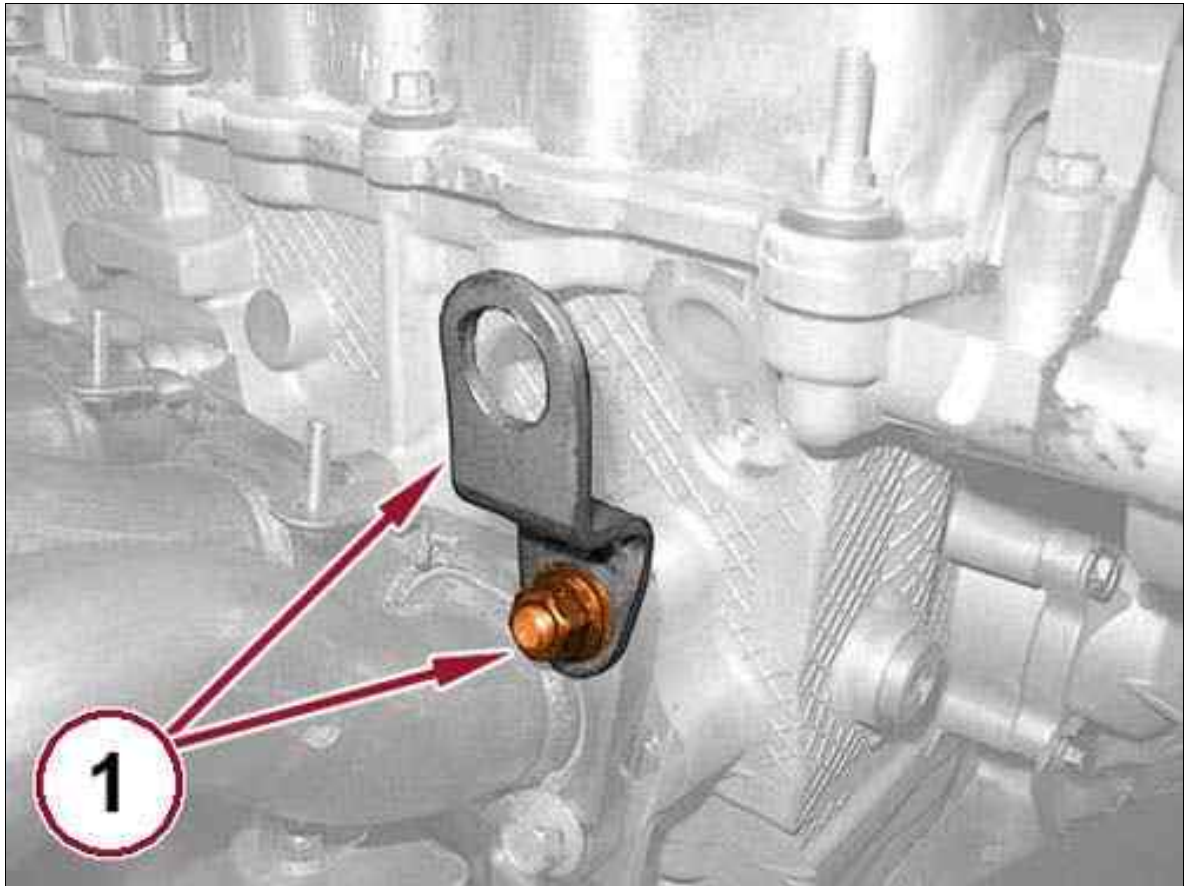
Engine Lifting Bracket & Exhaust Manifold Nut
